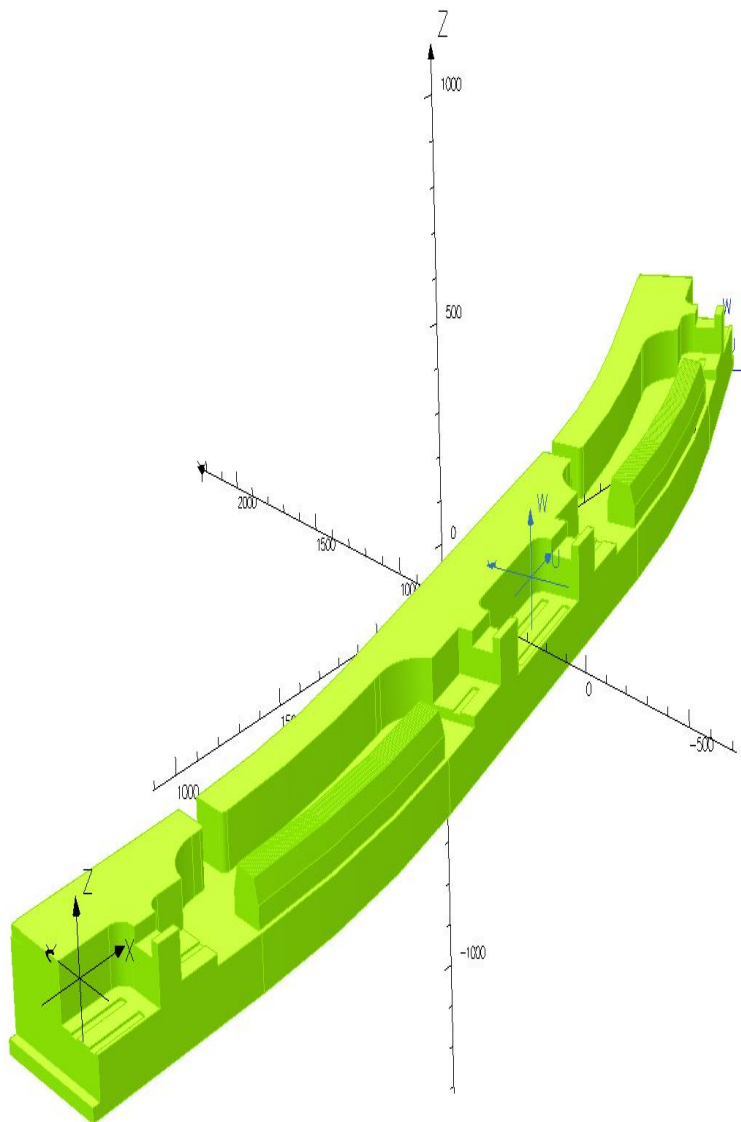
The magnet structure of a lattice cell is machined into one solid block of iron. The lower half of such a structure is shown here.
